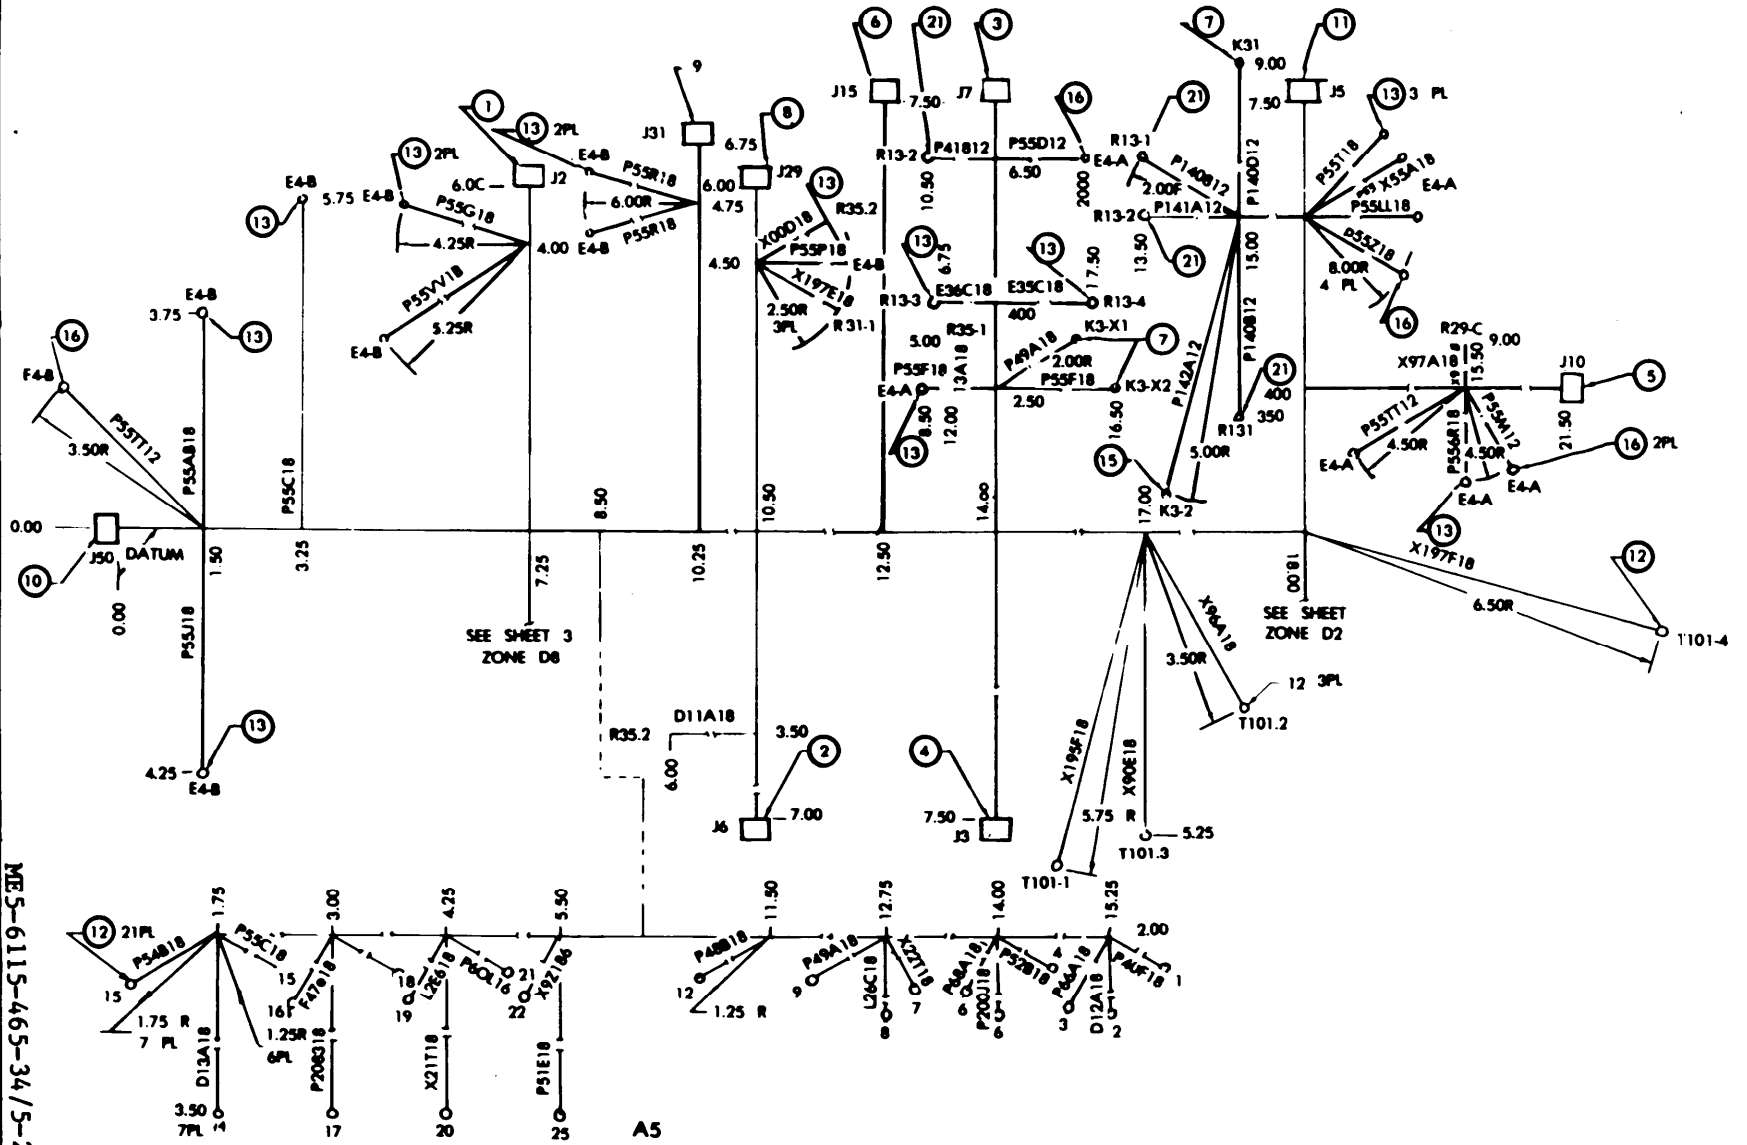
Special Relay Assembly Wiring Harness, Drawing No. 72-2239 (Sheet 2 of 3)
